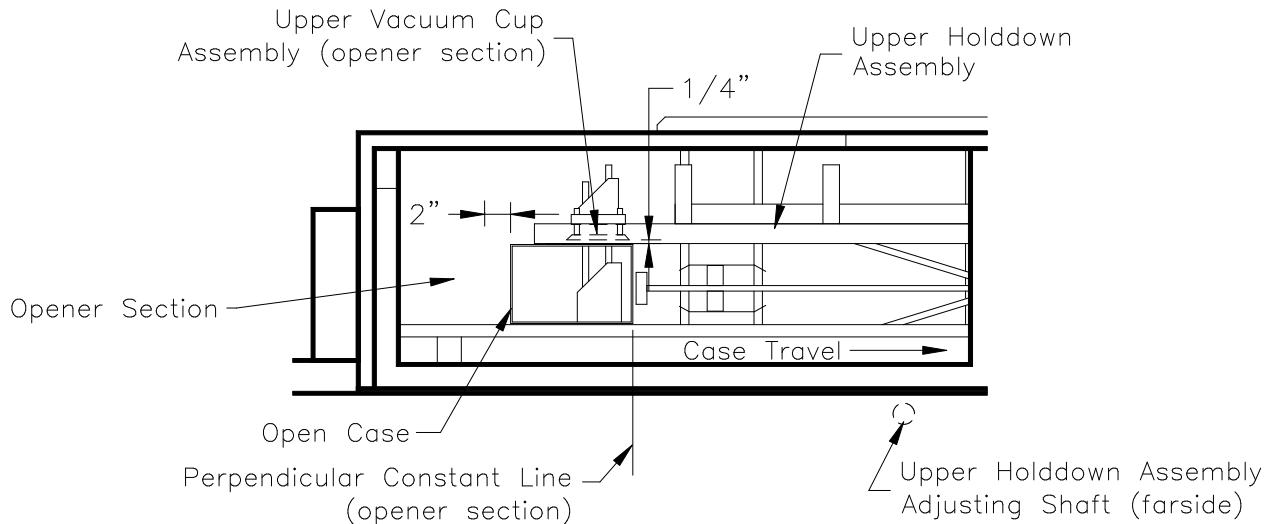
ADJUSTING FOR K.D. IN ERECT POSITION
